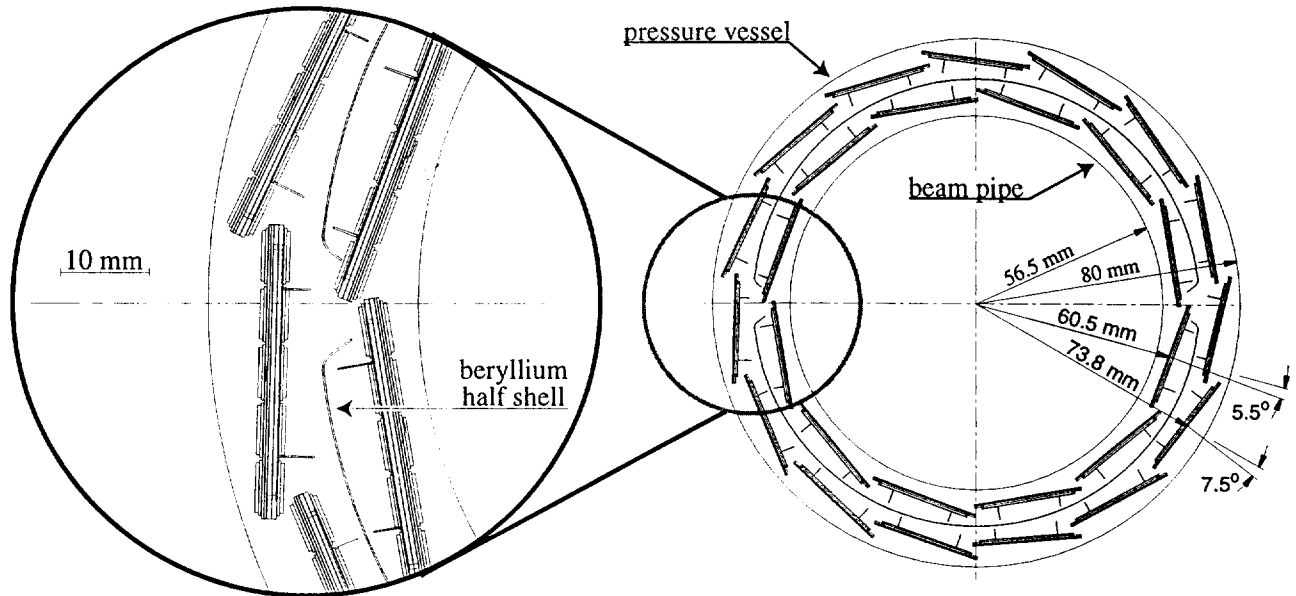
End-on view of the geometrical ladder configuration. The important radial dimensions are indicated. On the left, part of the figure is magnified, showing more details of the structure and illustrating the tight mechanical tolerances.
